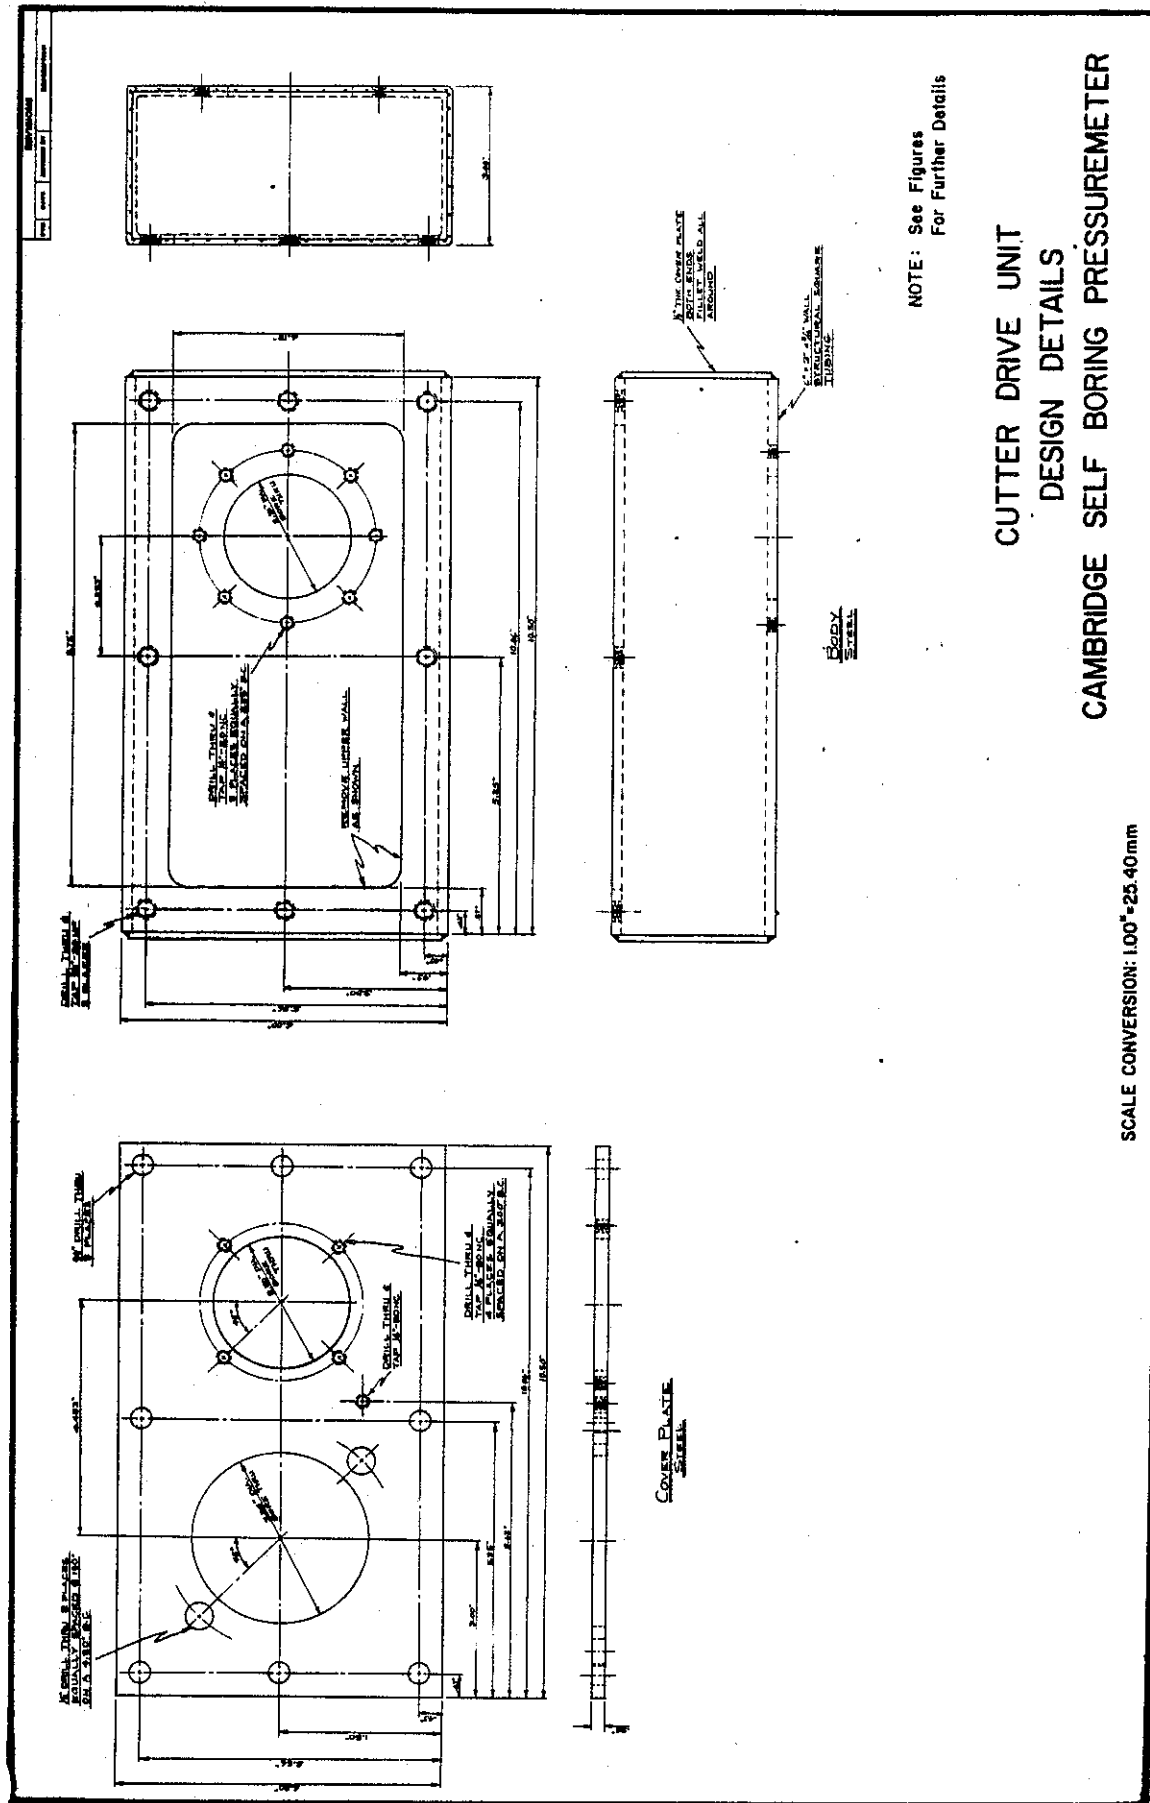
CUTTER DRIVE UNIT... DESIGN DETAILS - 2
